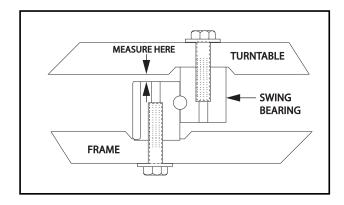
Swing Bearing Tolerance Measuring Point
